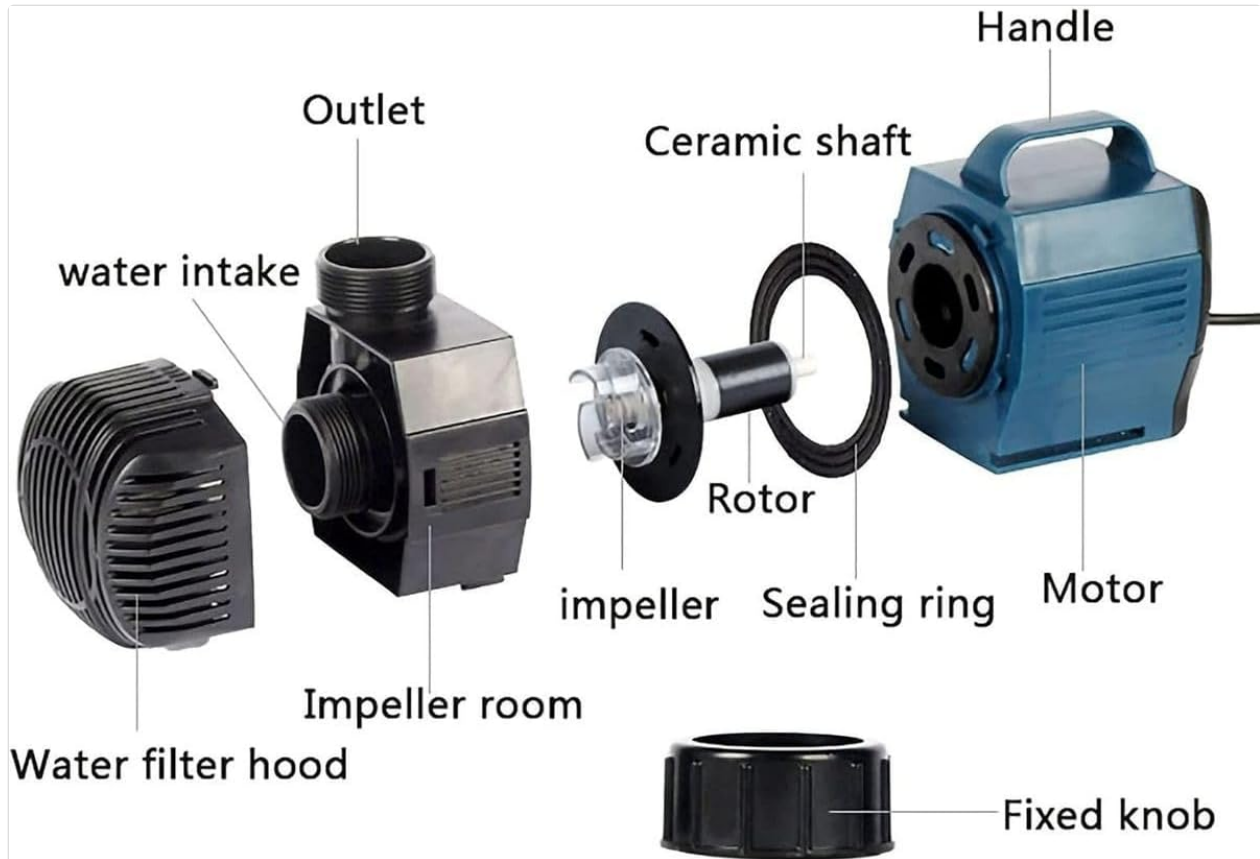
Exploded view of the pump, showing its individual components including the water filter hood, water intake, impeller room, outlet, impeller, rotor, sealing ring, ceramic shaft, motor, handle, and fixed knob.
